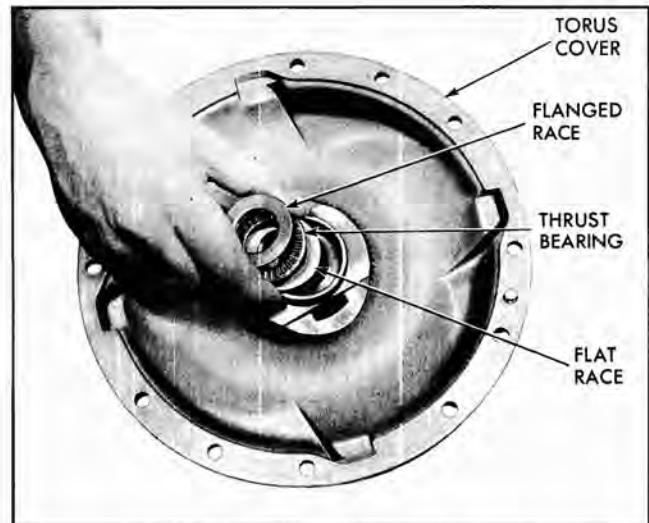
Installing Thrust Bearing and Race in Torus Cover
